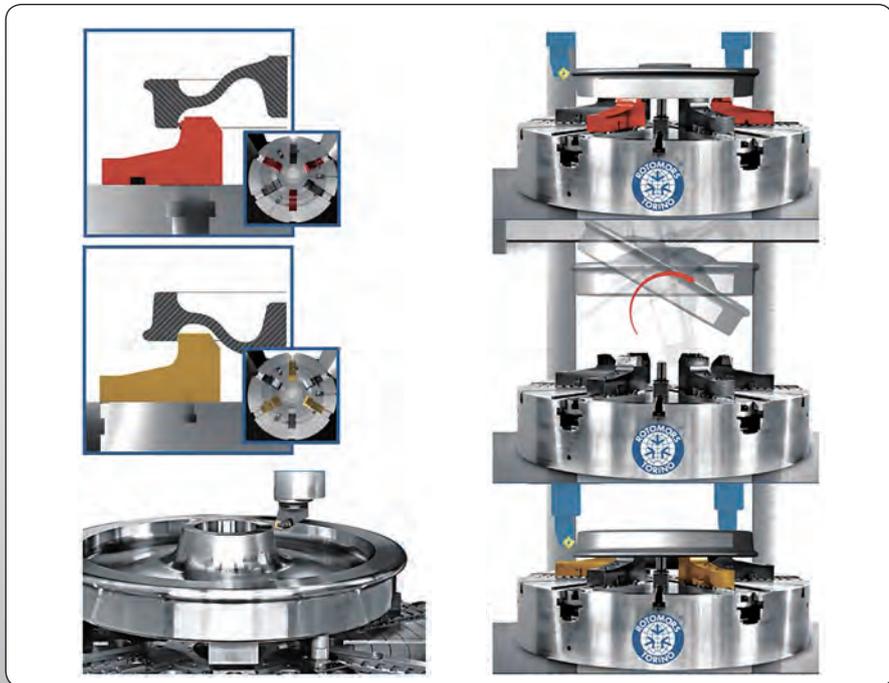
Workpiece moving freely in the manufacturing process [Rotomors]
